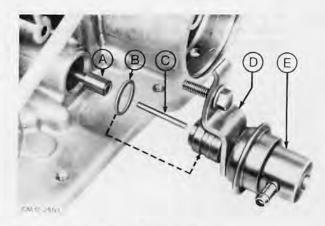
Remove vacuum diaphragm D - Vacuum diaphragm
